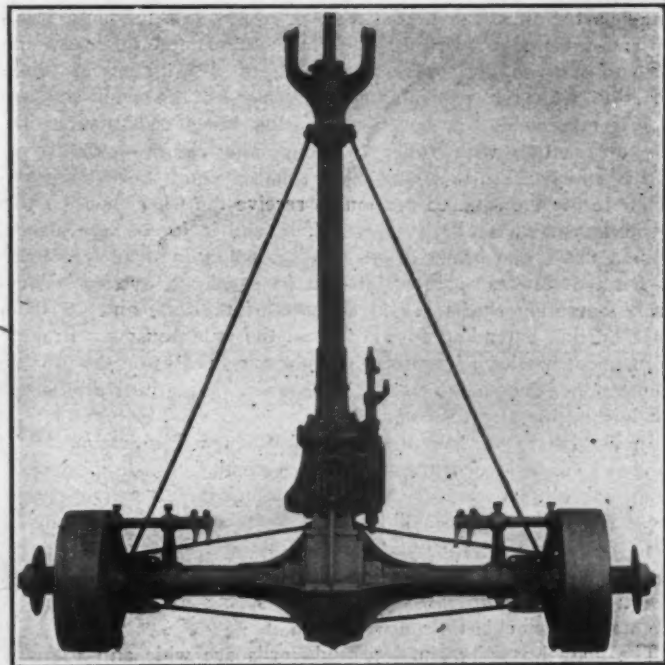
Rear system of Henderson, showing position of gearbox and torque rods
